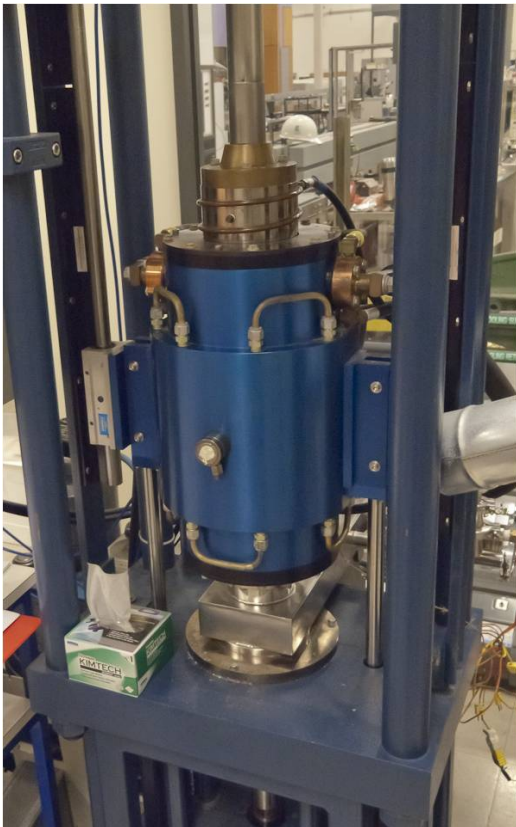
OSU diffusion welding furnace and ram assembly.
